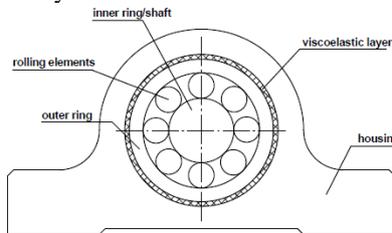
A Viscoelastic Layer Mounted Between The Bearing Outer Ring and The Housing.
